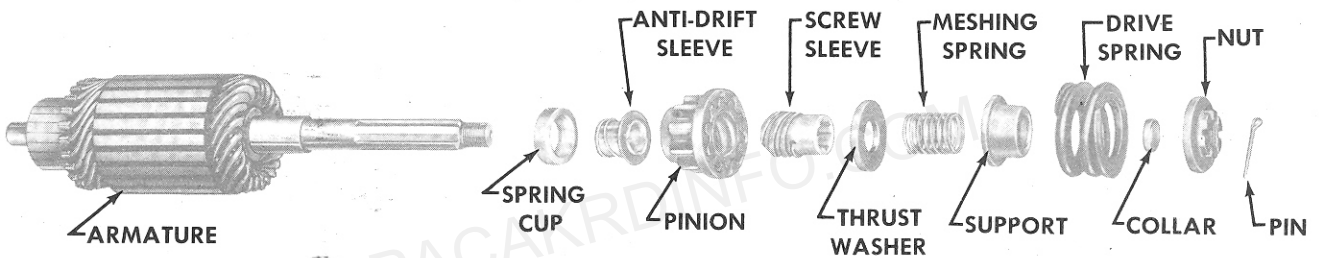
Exploded view of a compression-spring type Bendix drive such as is used on the cranking motor illustrated in Figure 7.
